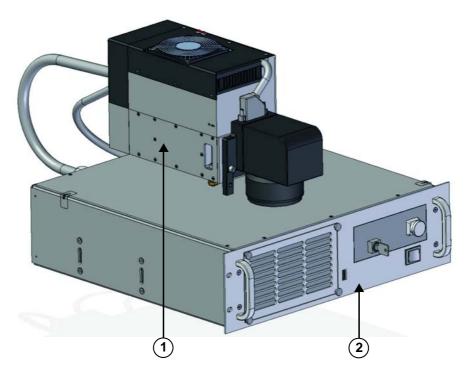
System view with laser head and plug-in supply unit, front view
